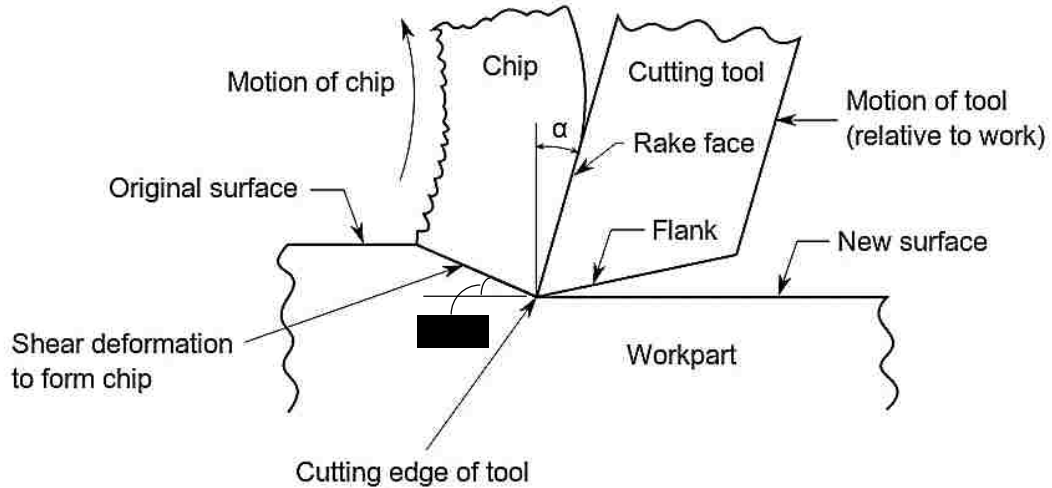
Mechanism of metal cutting in an orthogonal machining process showing a cutting tool with rake angle ' α ' forming a chip with a shear angle ' ϕ ' [10]
